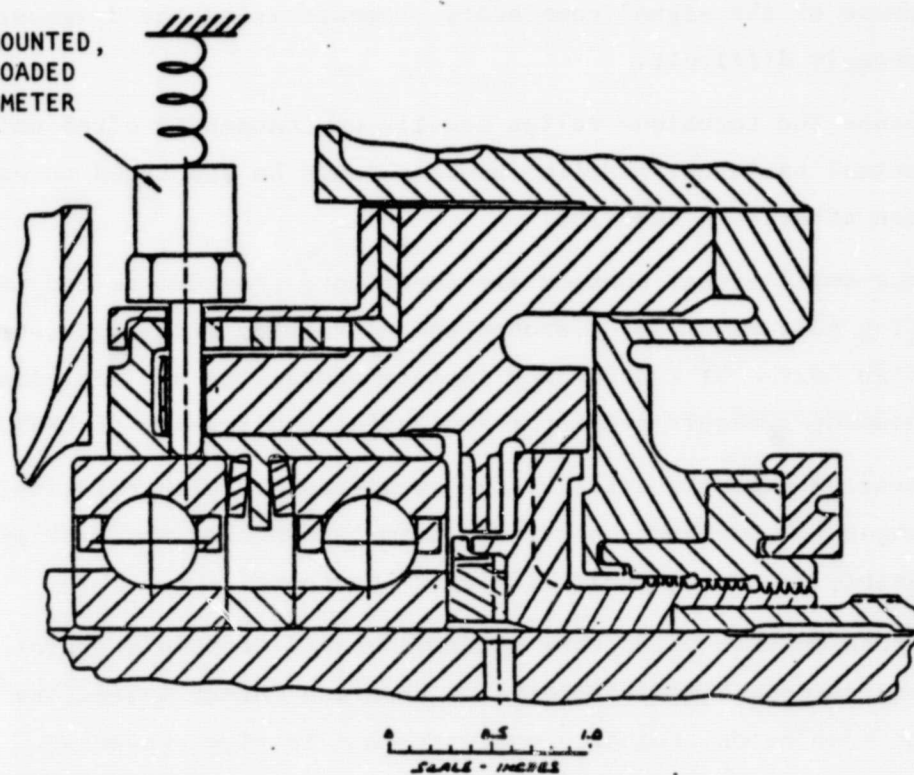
Accelerometer Mounting Concepts, HPOTP Turbine End
